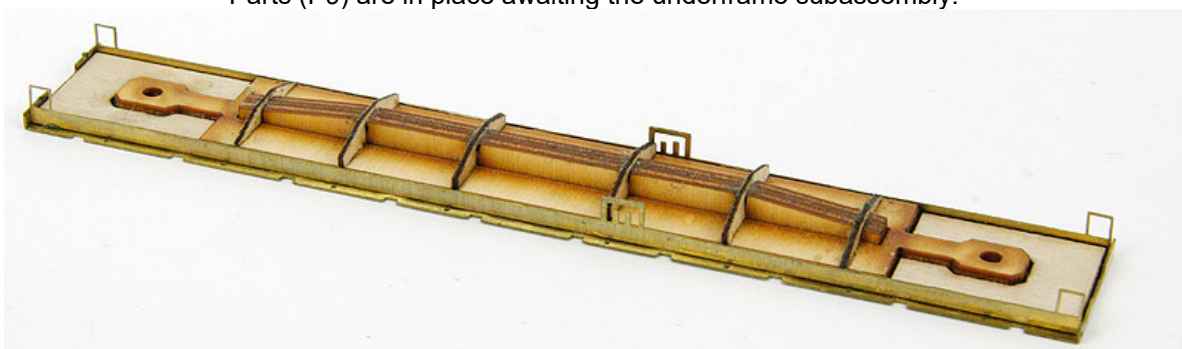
Completed underframe minus bolster spacers and end bulkhead assemblies.
